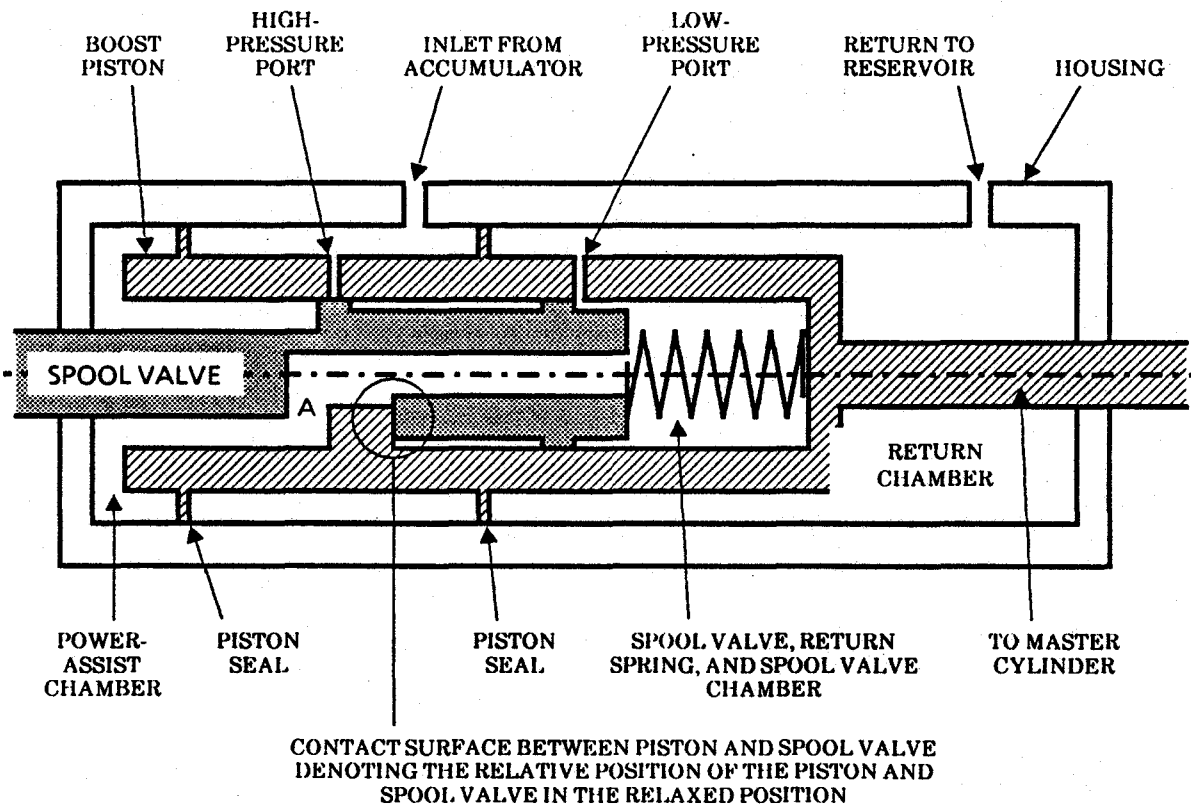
HYDRAULIC BRAKE-ASSIST SERVO IN RELAXED POSITION
